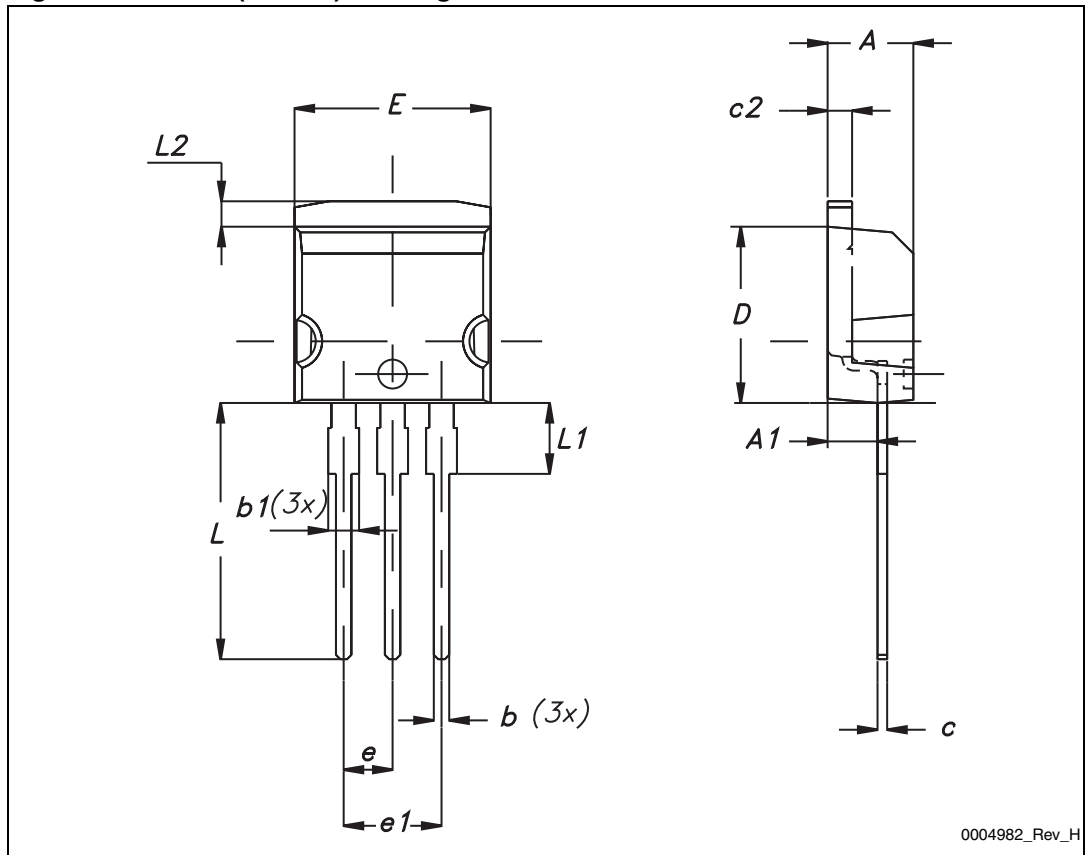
I<sup>2</sup>PAK (TO-262) drawing
